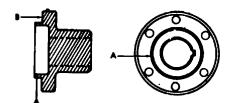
Vibration and crankshaft hub eccentricity and wobble measurements.
